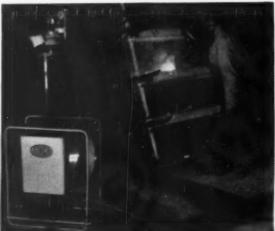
Reinforcing angles are welded to tank side plate using gas-shielded metal arc process.
